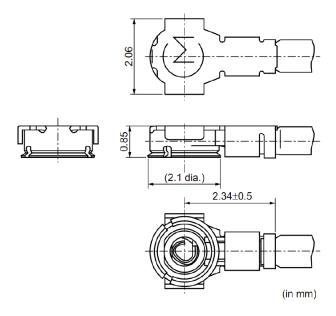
Dimensions of Mated Plugs Using Ø0.81 mm Coaxial Cables (Unit: mm)
